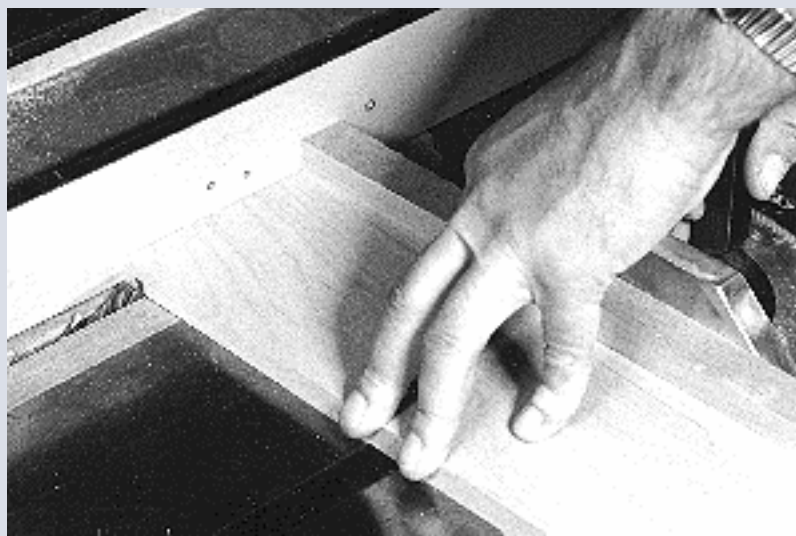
Set up with your miter gauge at the table saw to make groove cuts for drawer joinery, if you choose this type of joint.
